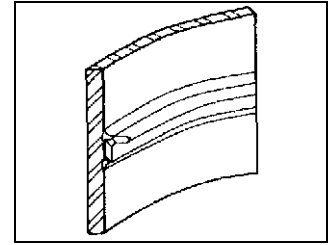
Tray support, full seal weld top & bottom — best crevice resistance
